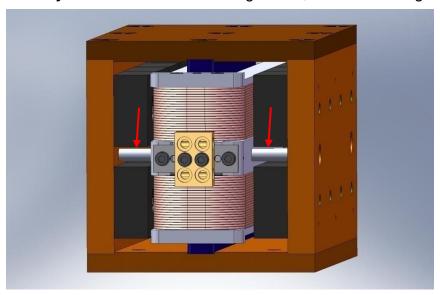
(4) shoulder screws are included when the Actuator is shipped, to "lock" the Bobbin to the Field Assembly. Make sure these are tight before proceeding with the rest of the assembly.
